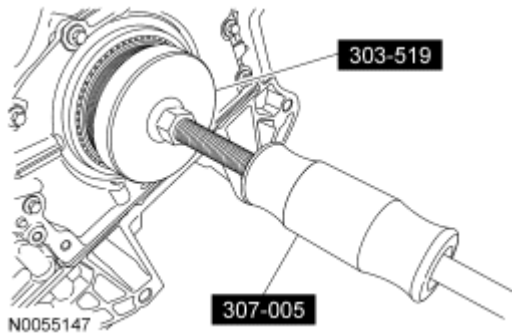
Removing Crankshaft Rear Seal Using Special Tools (303-519) & (307-005)
